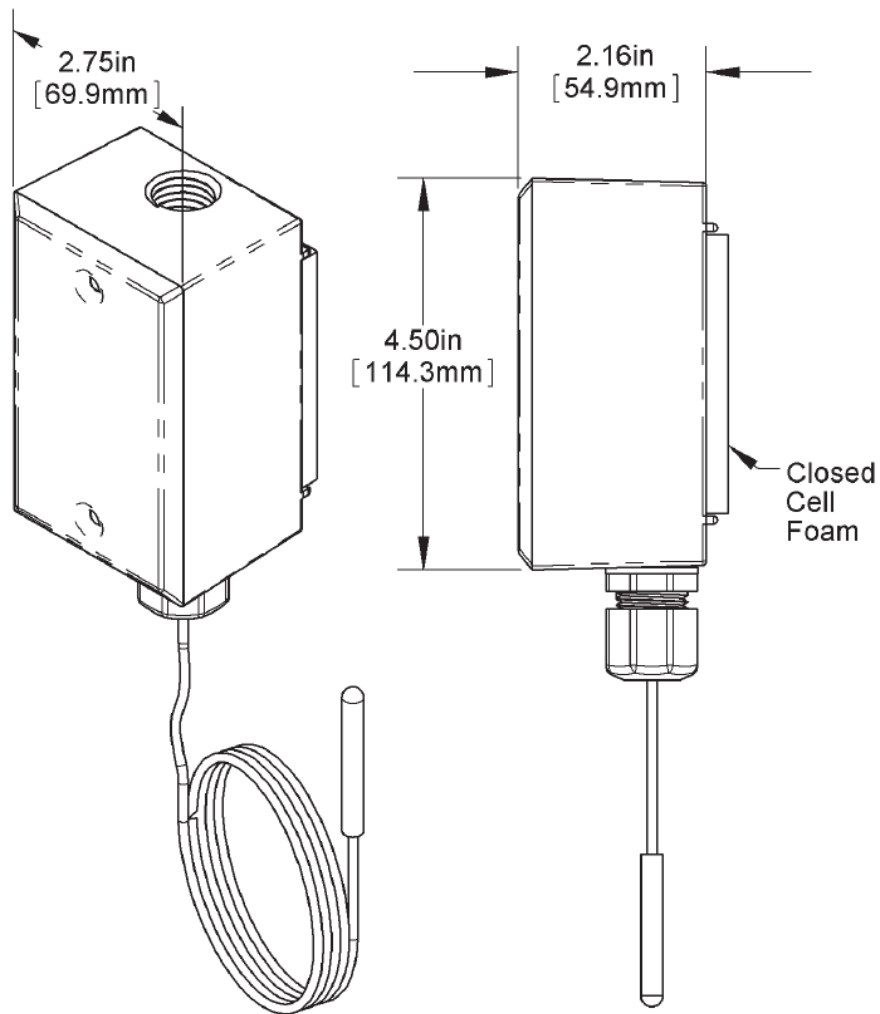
Remote Probe in a Weatherproof (WP) Enclosure
